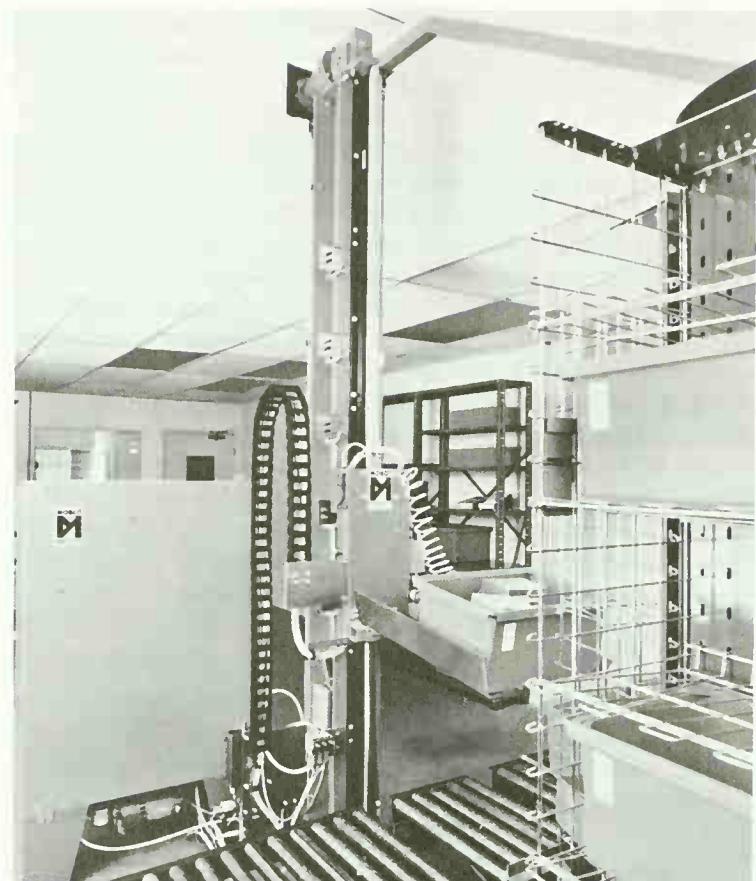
Mobot robot used to pick and place parts totes into various bins of a carousel storage rack. (Courtesy of Mobot Corp.)
